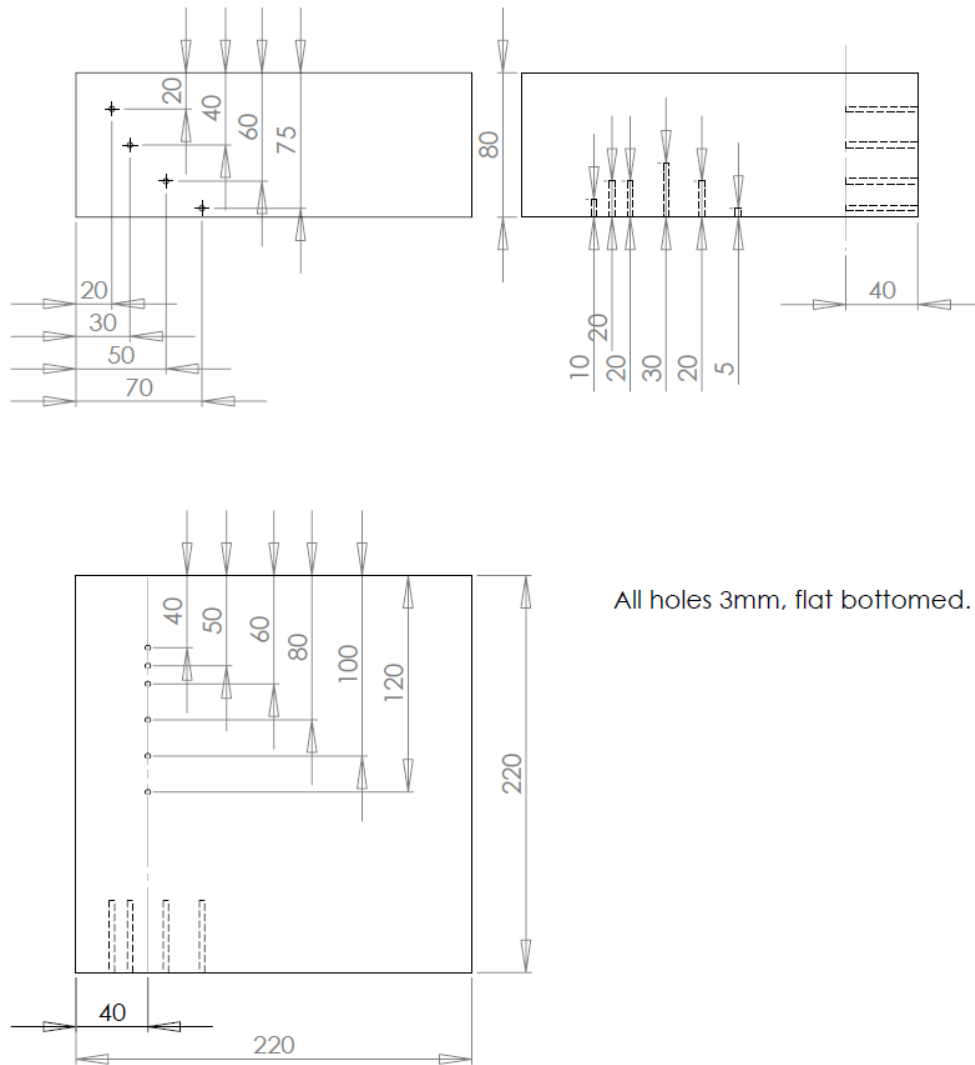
Test block schematic showing both side drilled, and flat bottomed hole defects.
